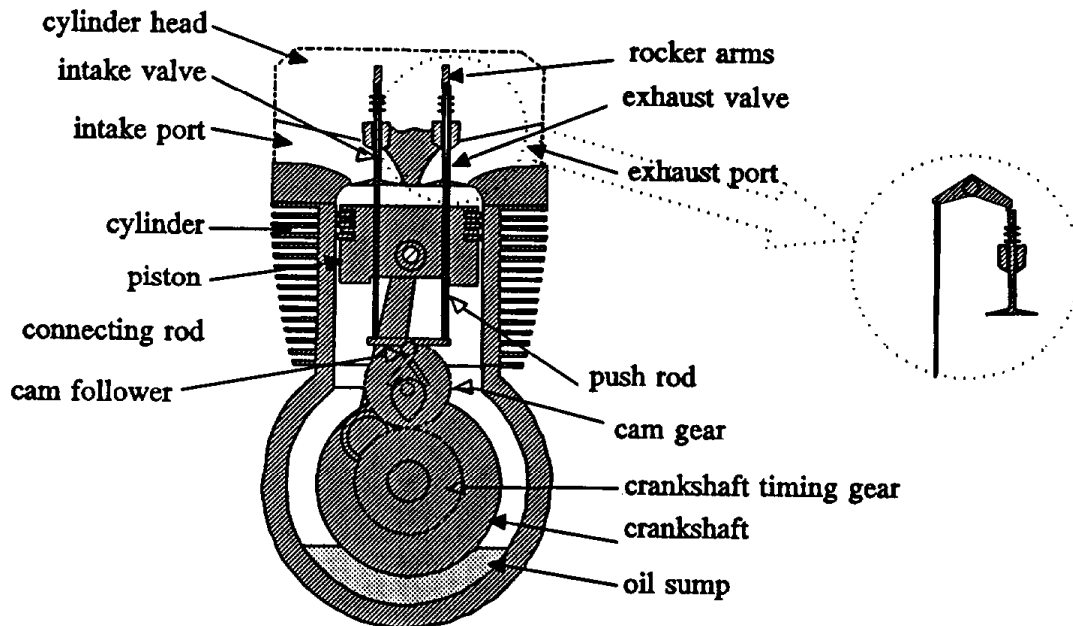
A typical overhead valve, four-stroke engine with push rod design.
